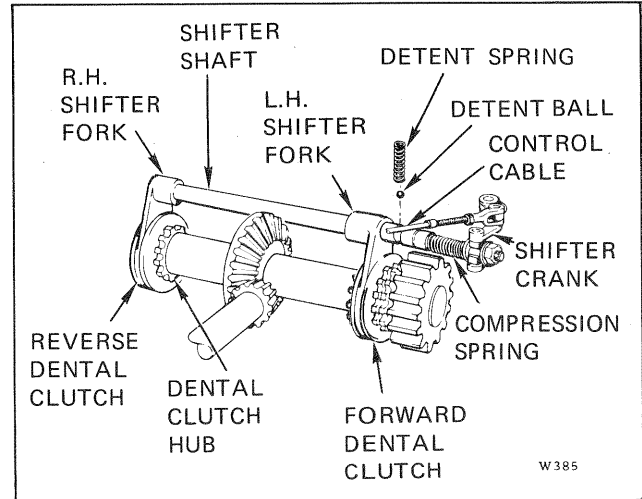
DIRECT DRIVE CLUTCH ASSEMBLY
